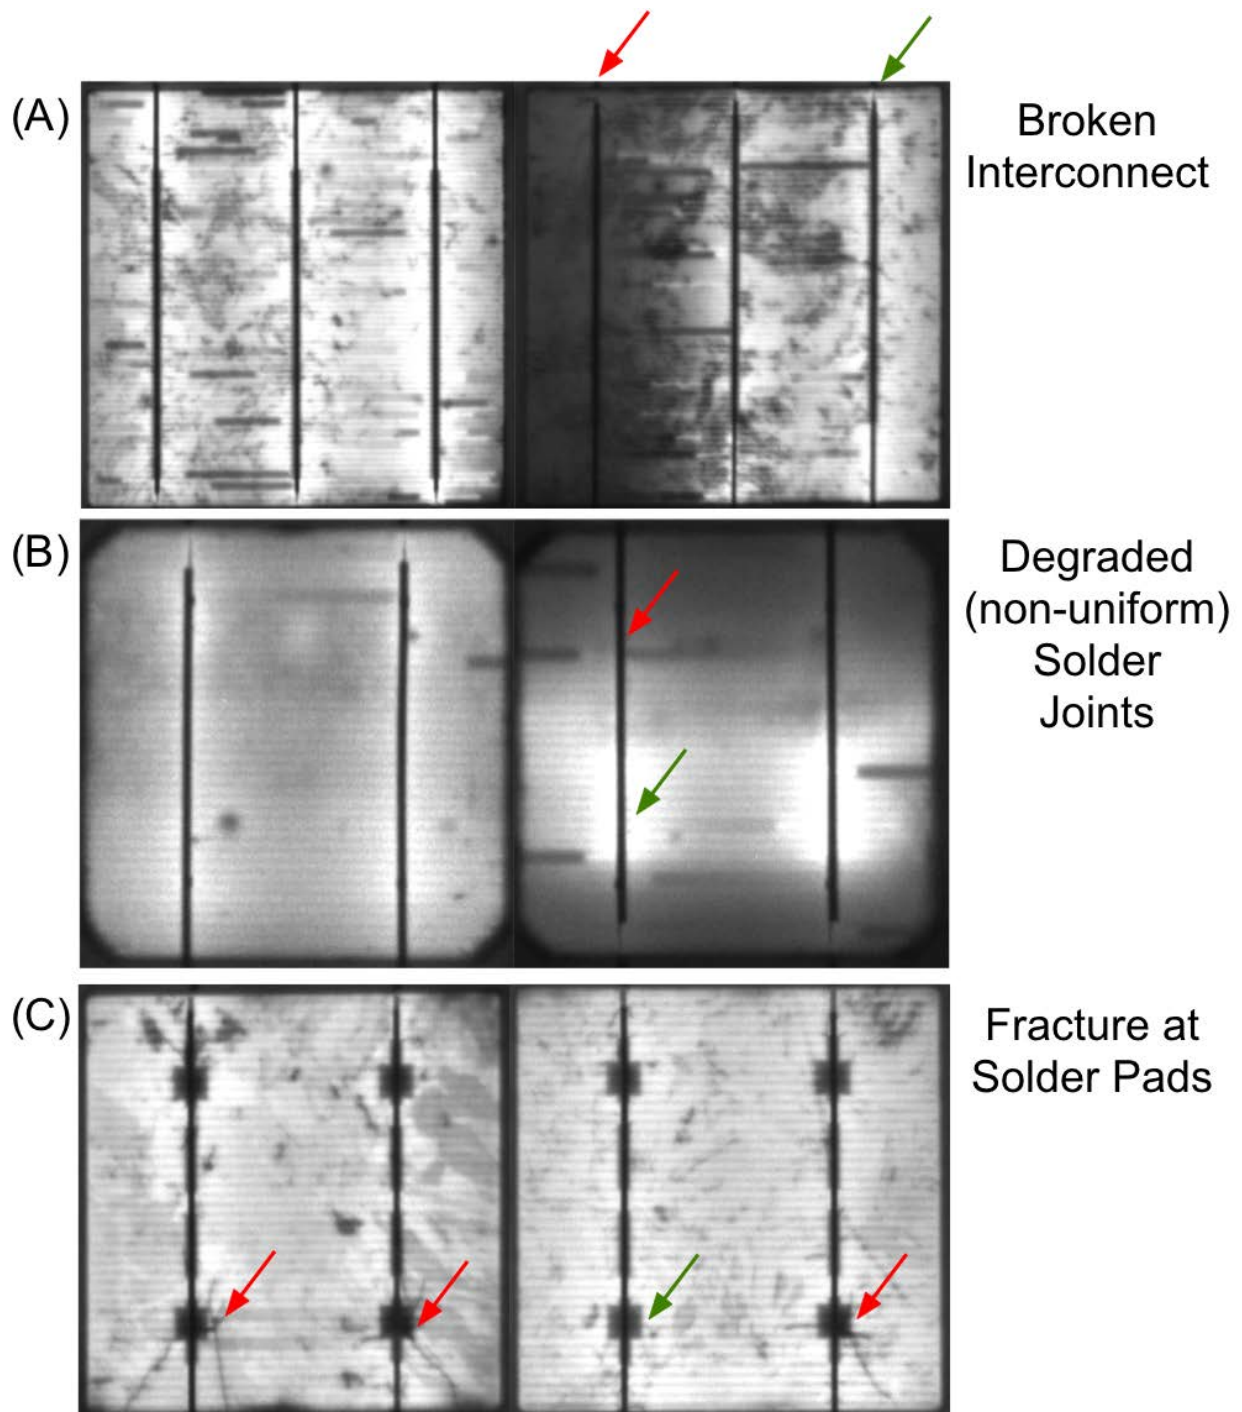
Example of module related defects; (A) broken interconnect highlighted in red, (B) degraded solder joint between the interconnect ribbon and the cell busbar, (C) cell fracture induced from the soldering process.
